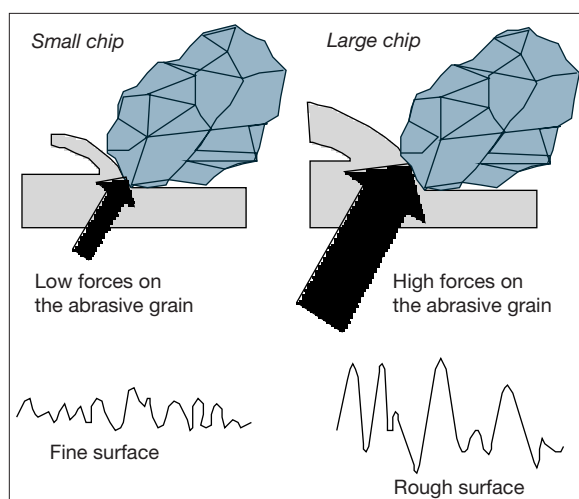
A large chip size results in a rougher surface finish on the workpiece.
